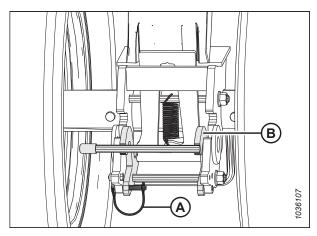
Left Transport Wheels – Rotation Lock Latch Engaged
